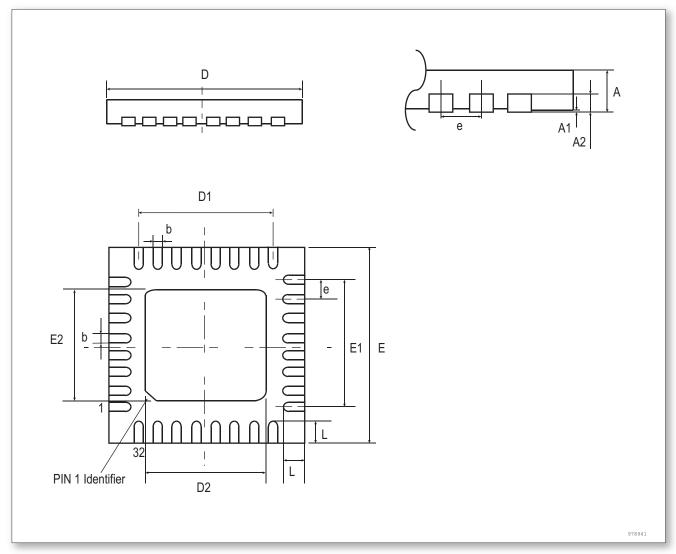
QFN32 - 32-pin quad flat no-leads package outline
